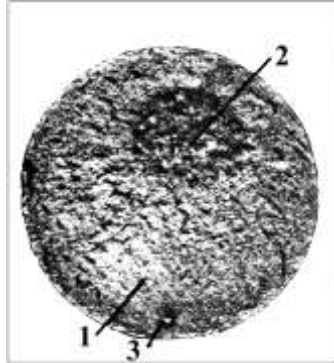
Fracture obtained in failure: 1 – fatigue zone; 2 – after-fracture zone; 3 – point of initiation of a crack
